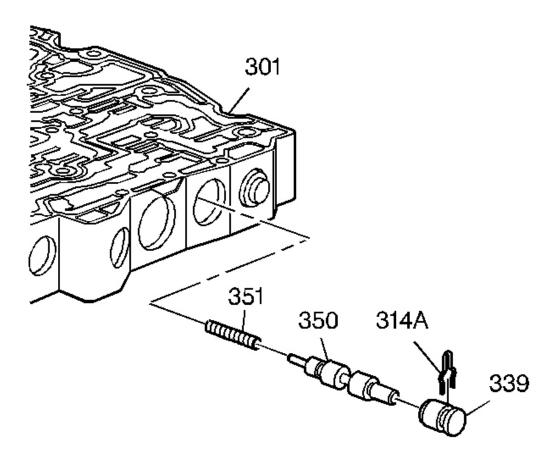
Locating 1-2 Accumulator Valve & 1-2 Accumulator Valve Spring Courtesy of GENERAL MOTORS CORP.
